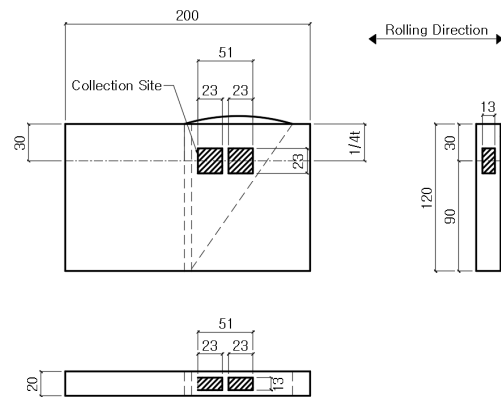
Weld zone chemical composition and microscopic piece
